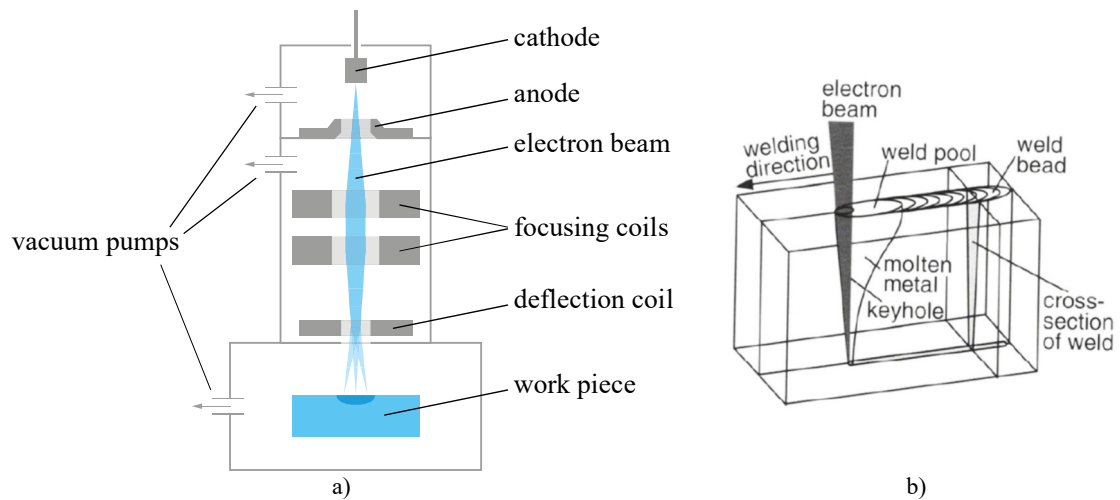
EBW a) Components of an EBW machine b) keyhole technique [65]
